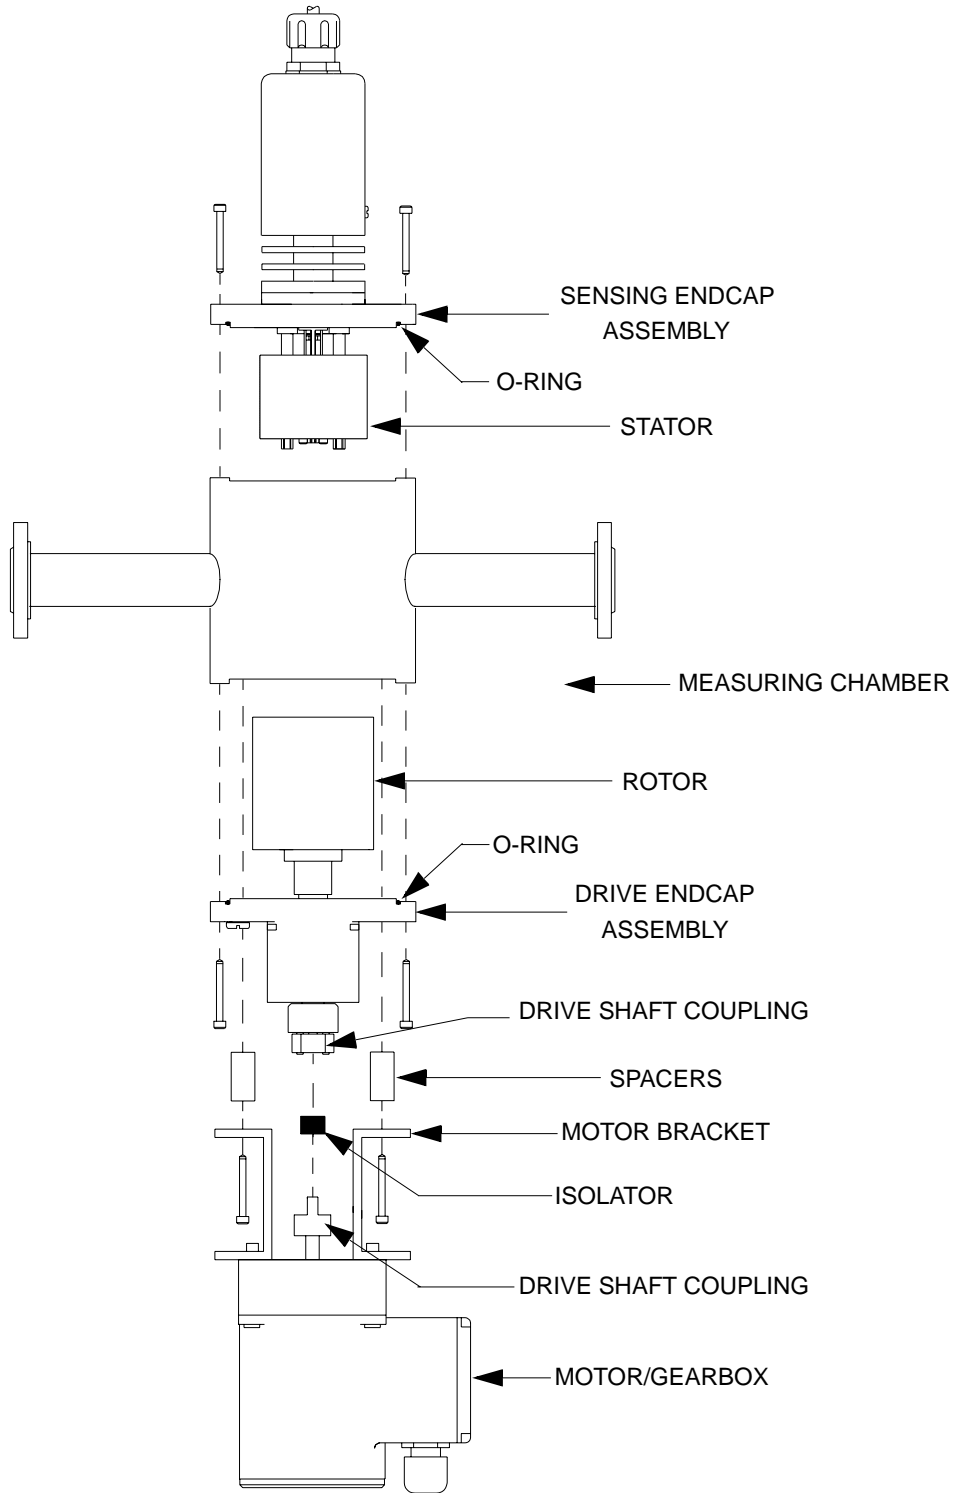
Typical Viscometer Disassembly for Cleaning
